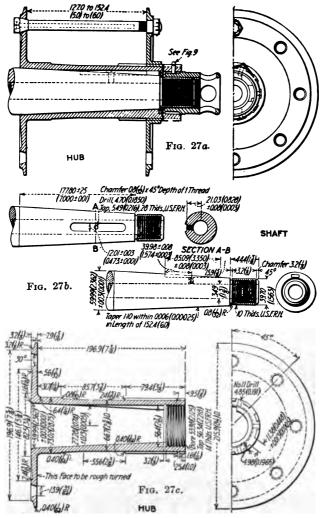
Assembly of hub. Fig. 27b.—Engine-shaft end. Fig. 27c.—Hub Figs 27a to 27c.—Details of standard propeller hub, 110 to 170 hp.
